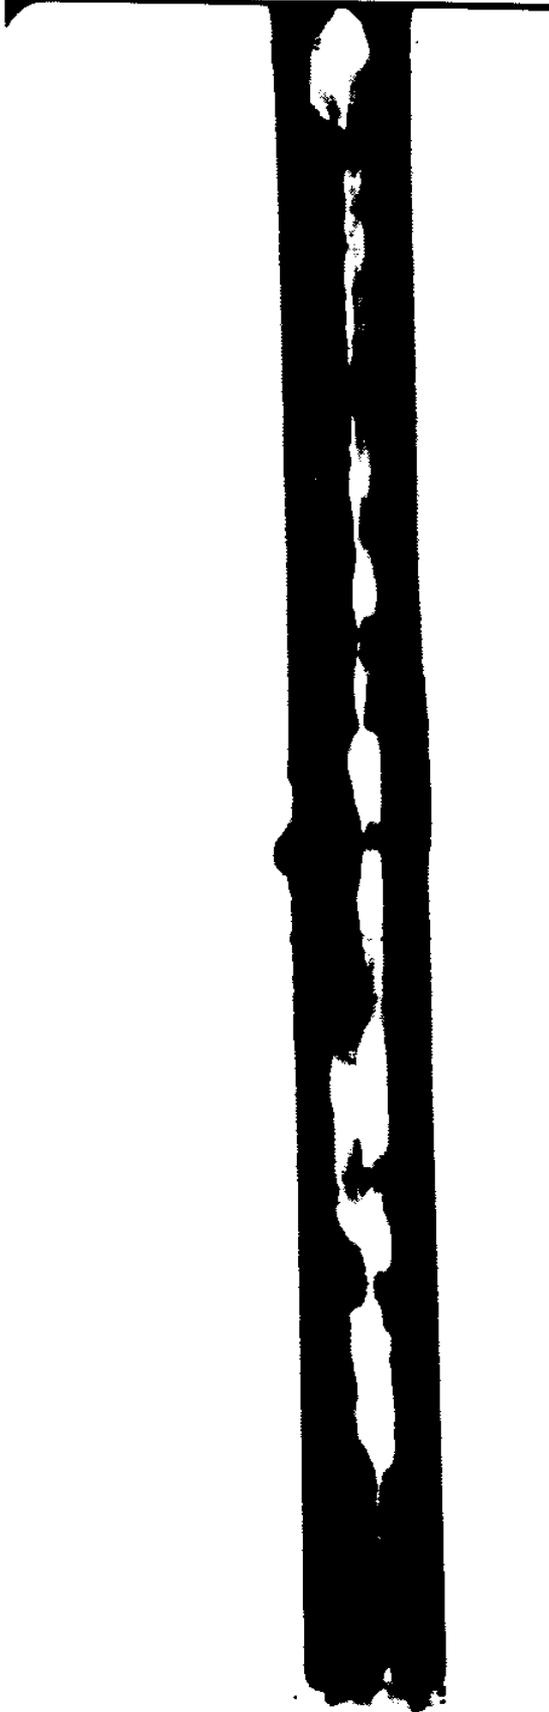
X-ray radiographs of underwater welds made by electrode Sl-e
